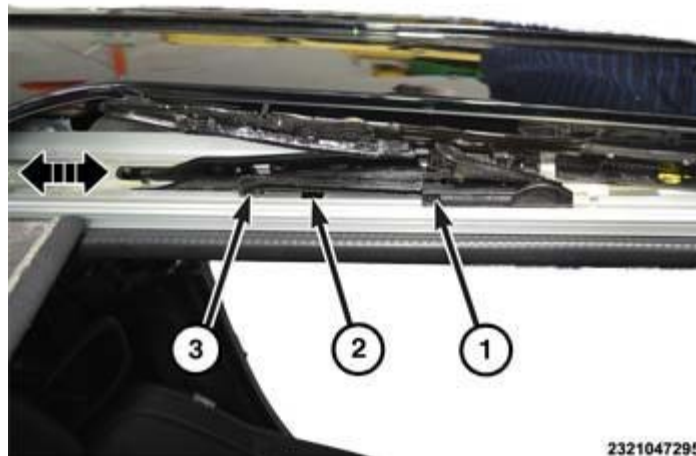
Glass Guide/Guide Carriage Assembly, Notch & Locking Tab
